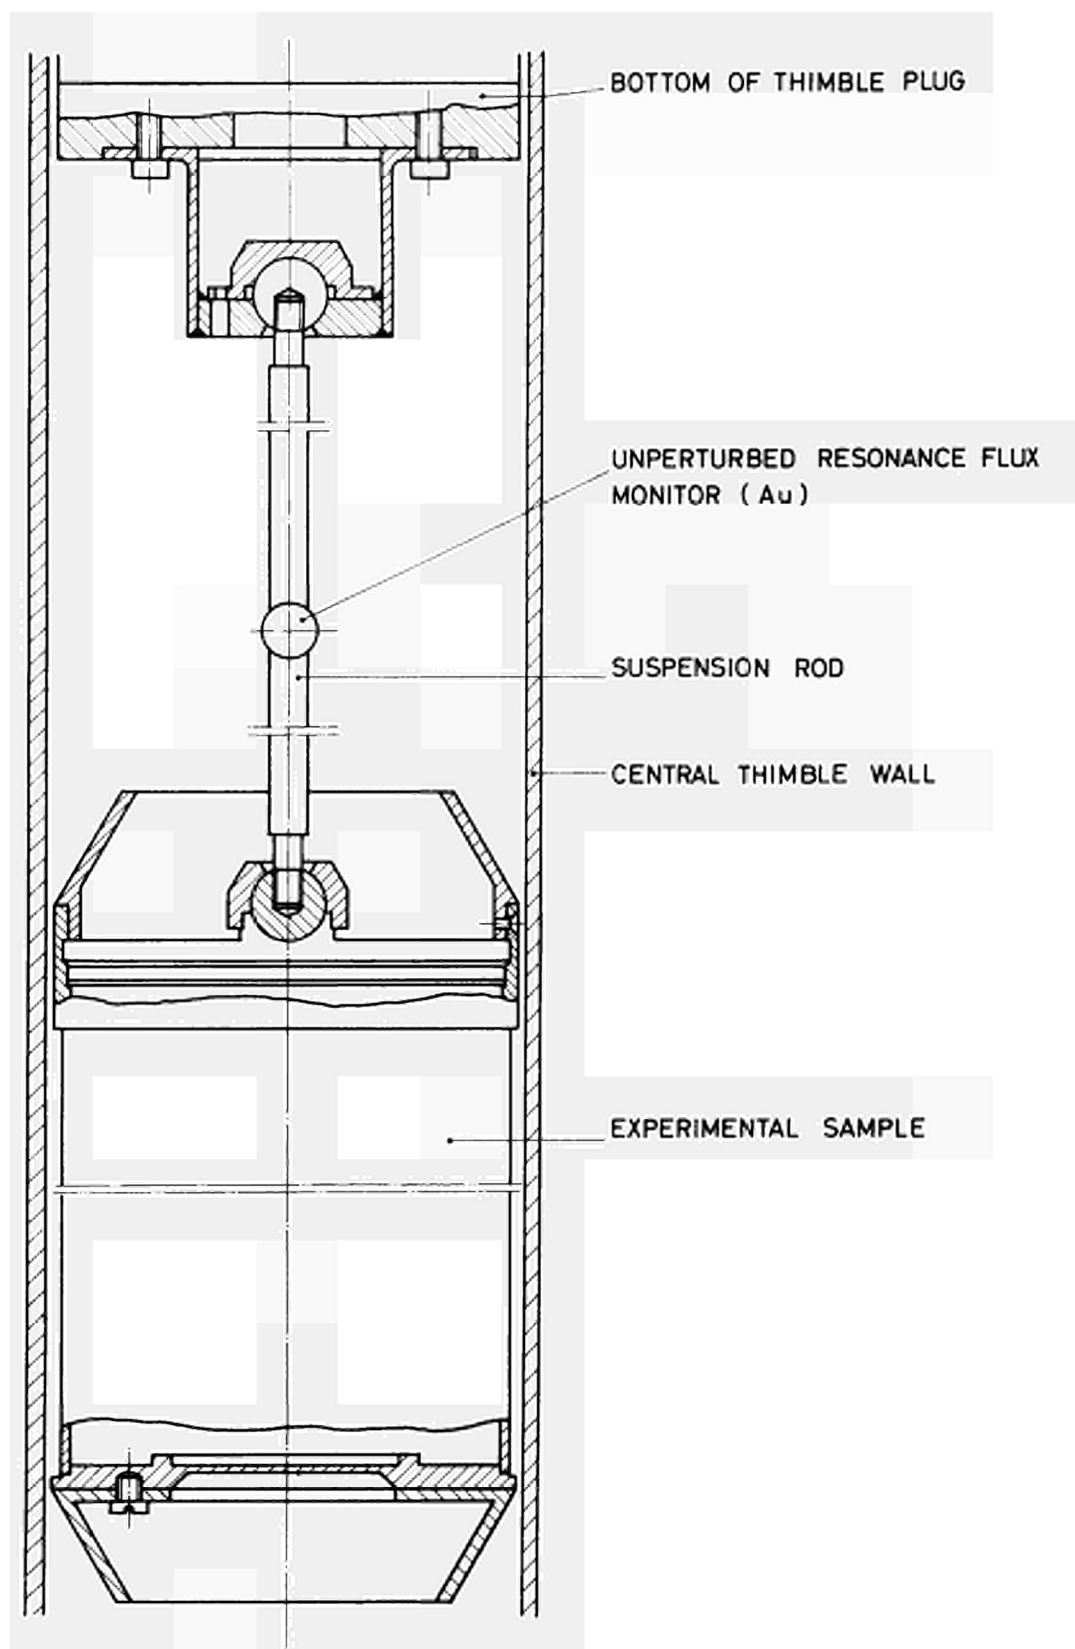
VIEW OF THE EXPERIMENTAL ASSEMBLY
